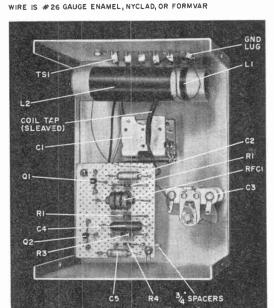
Start construction by drilling holes in the aluminum box to accommodate the tuning dial shaft and regeneration control. Then drill mounting holes for the circuit board and coil form as shown here.
